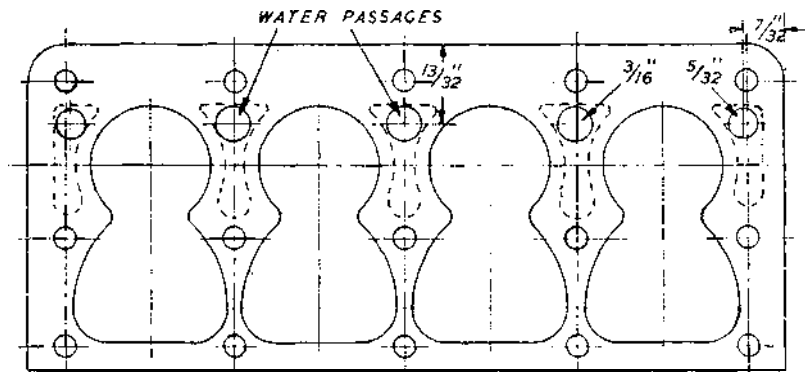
Plan, of cylinder-head joint surface, showing position of water communication holes. Dotted lines indicate how holes may be enlarged to suit thermo-syphon circulation
